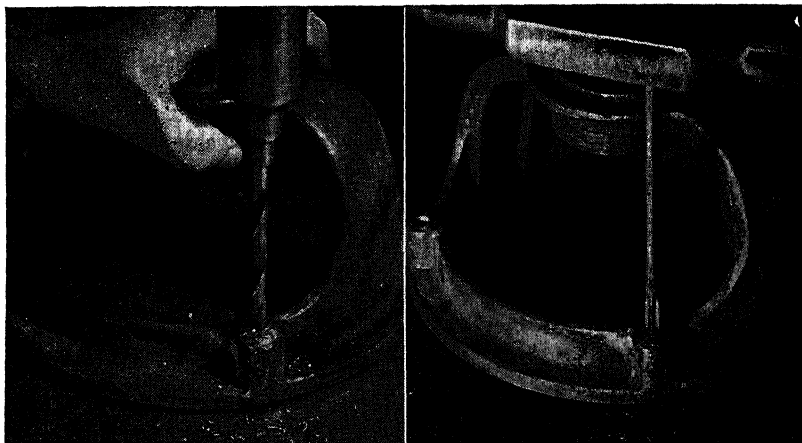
This illustrates the machinability of cast iron welded with non-ferrous alloy electrodes designed for the correction of machining errors and other defects in cast iron. The weld deposit and fusion zone are exceptionally soft and can be drilled, tapped or cut readily.
